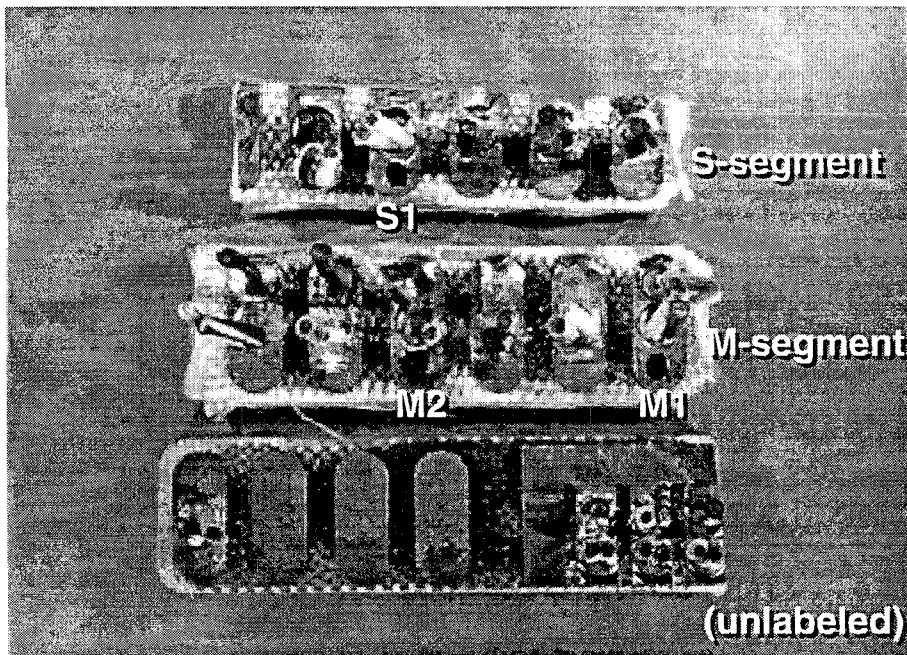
Photograph of the circuit board segments labeled "S", "M", and an unlabelled part, taken from circuit boards #5, #4, and #3 of the MC1814 unit, respectively. The solder joints used for analysis are identified in the photograph.
